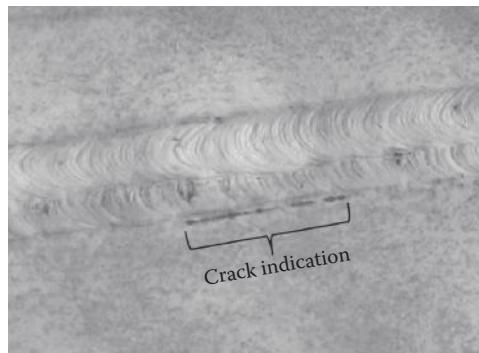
Photograph of crack indication at the toe of a fillet weld.
